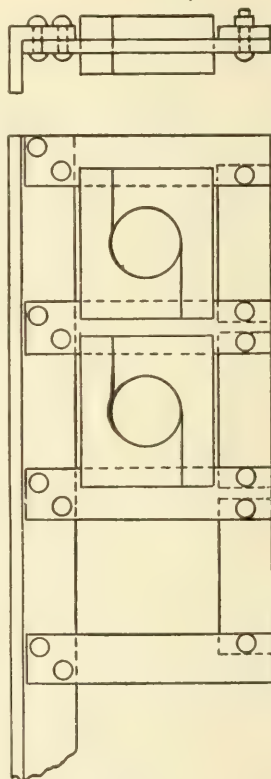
Elevation and Plan of Insulators Held in Angle-Iron Frames.
